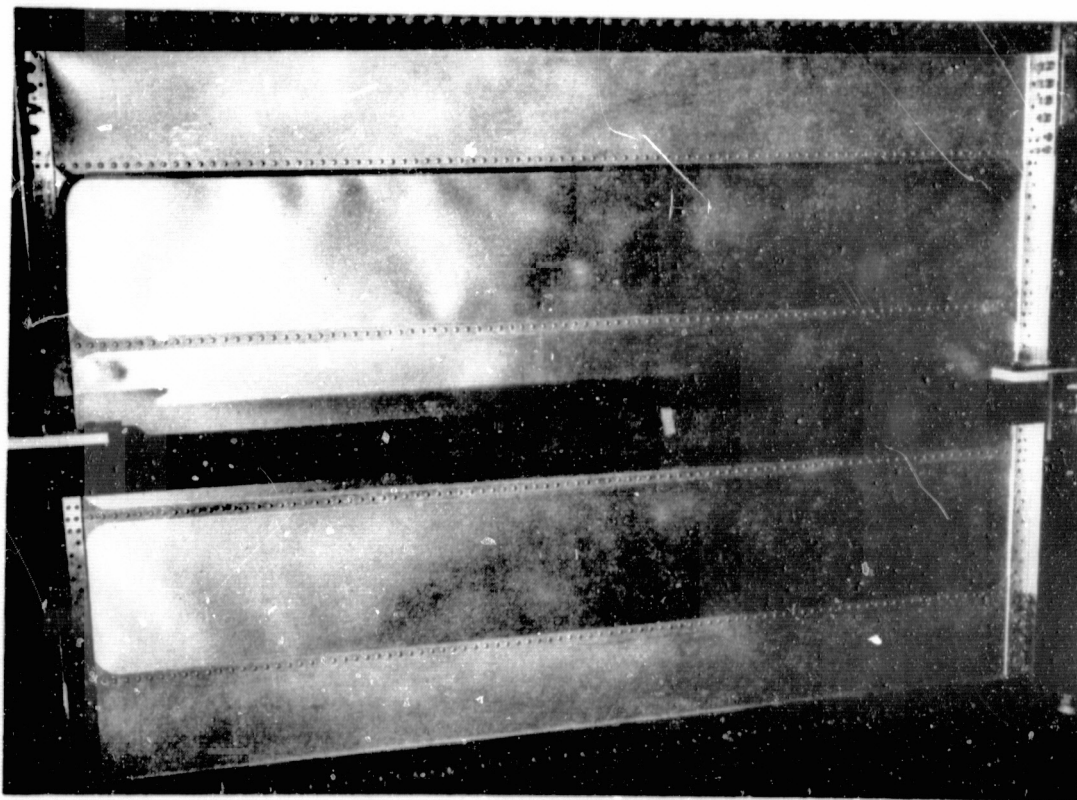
Test #15, Panel N after Fatigue Failure
